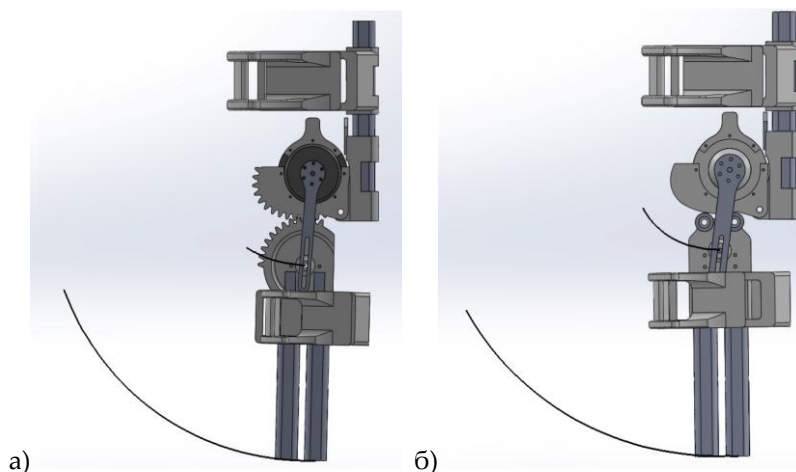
Trajectory graphs Assembled model: (a) Geared concept. (b) Ball bearing
